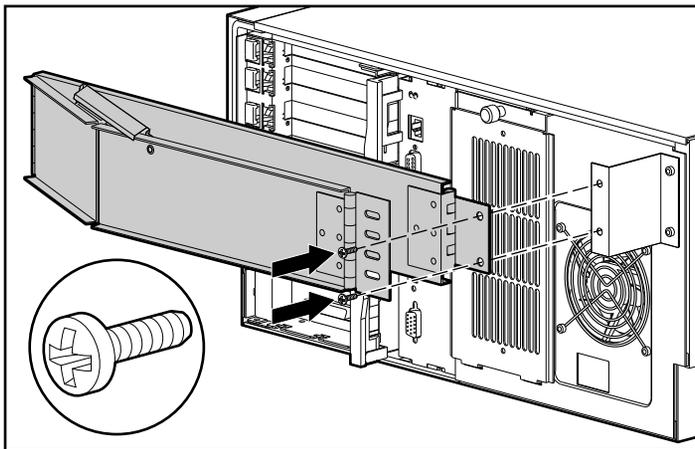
Attaching the cable management arm to the cable management arm bracket
